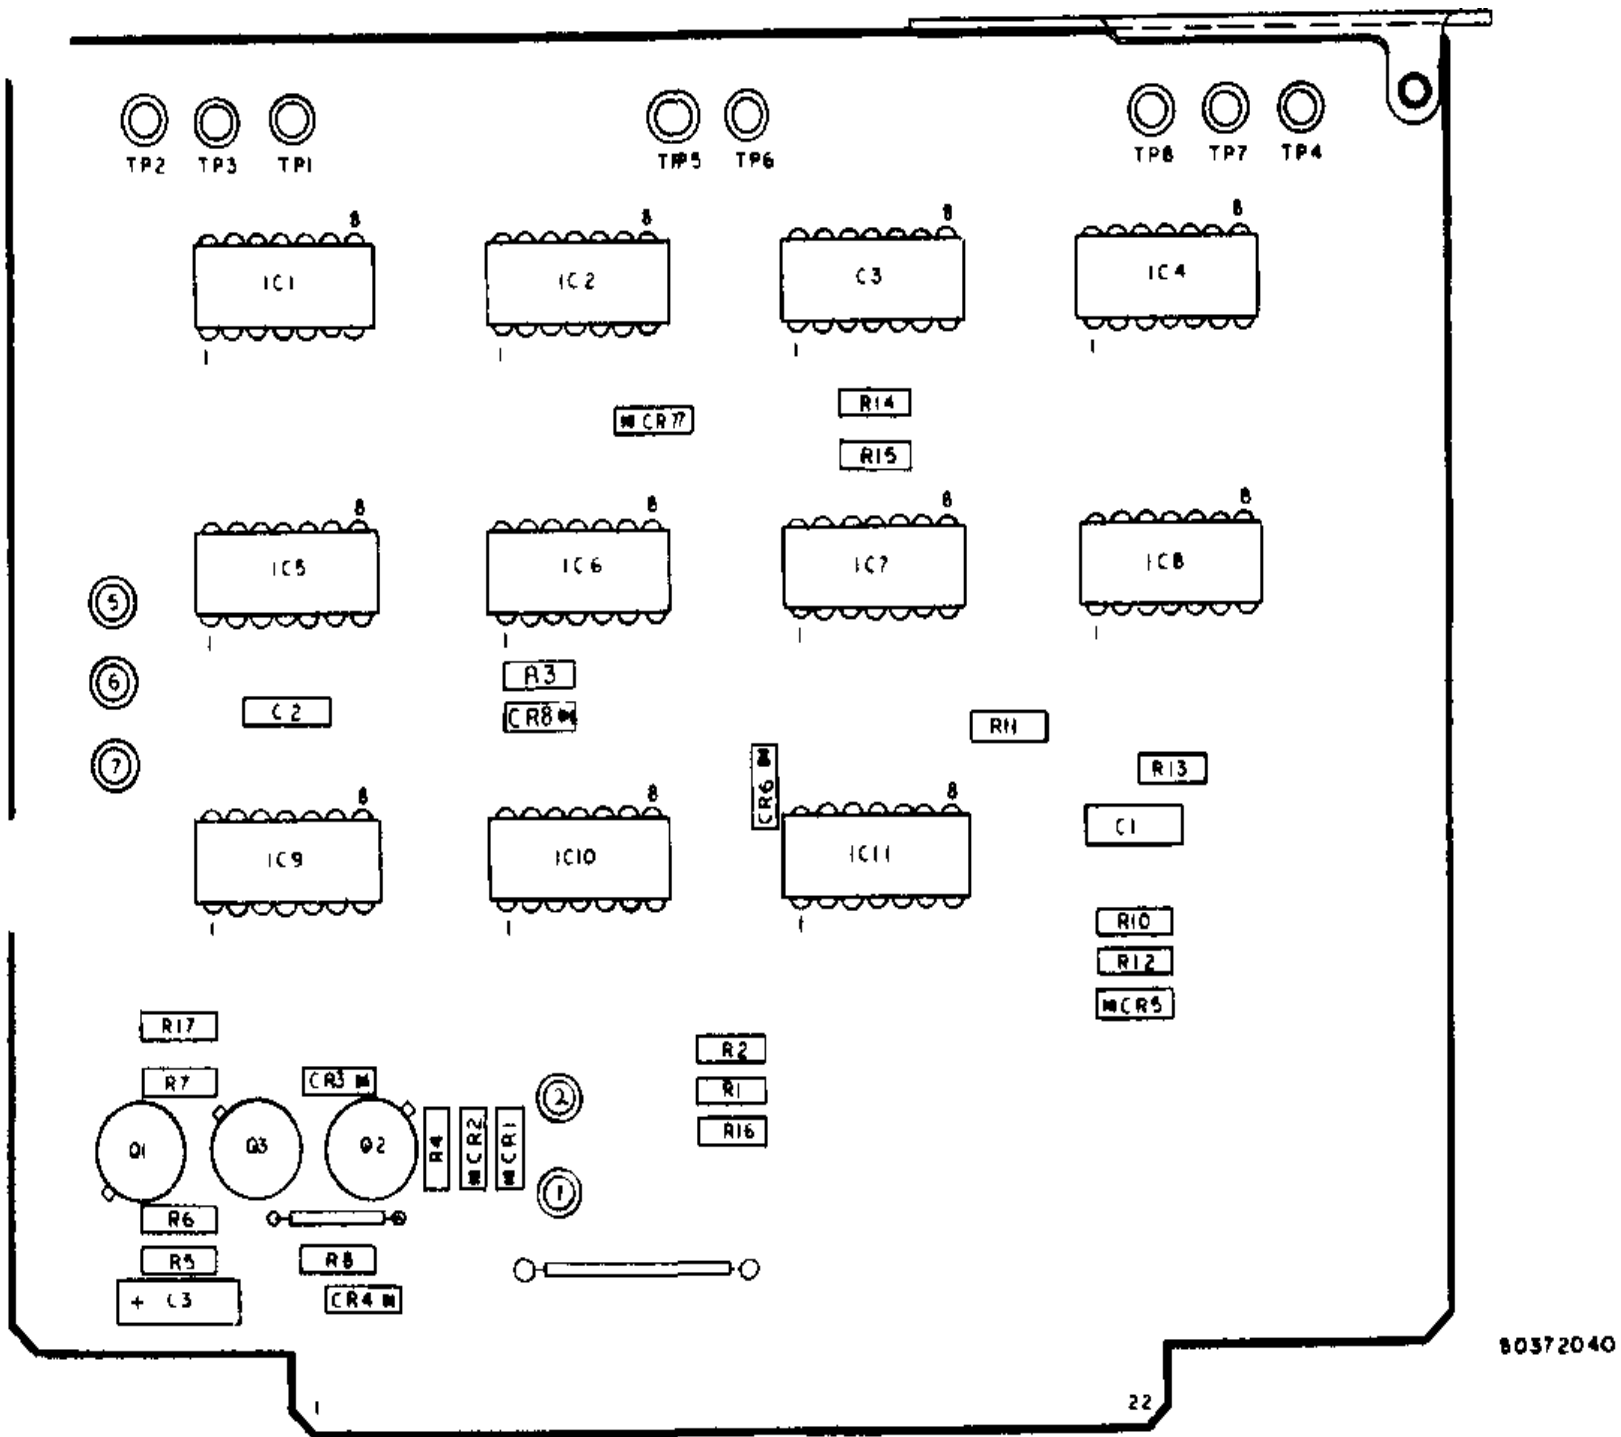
Component Locations - Message Control Circuits, Assembly A4
